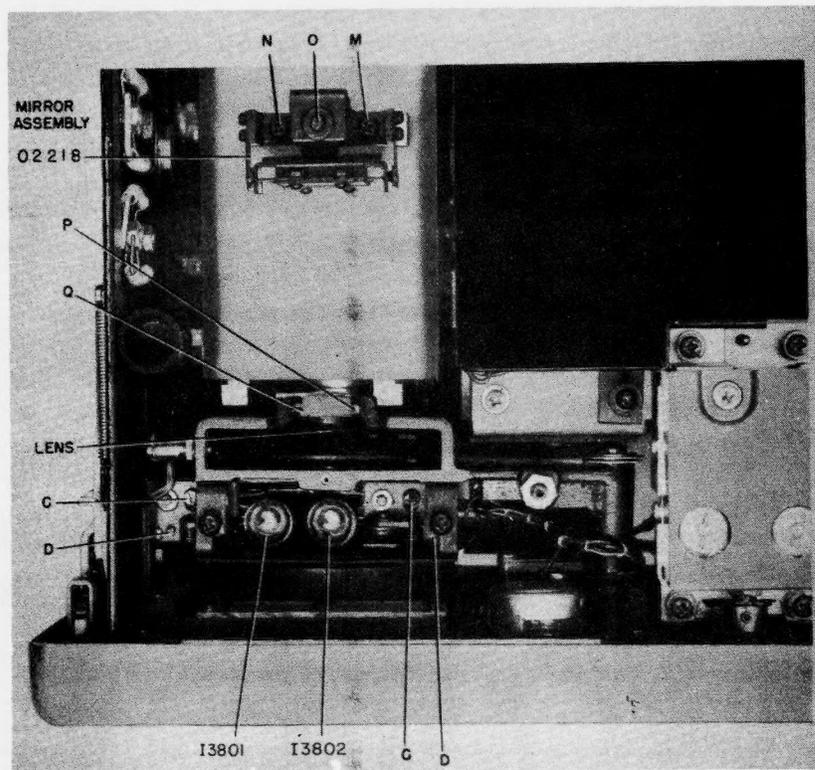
Lens-Arm Assembly and Dial Light Compartment, Cover Removed, Top View
